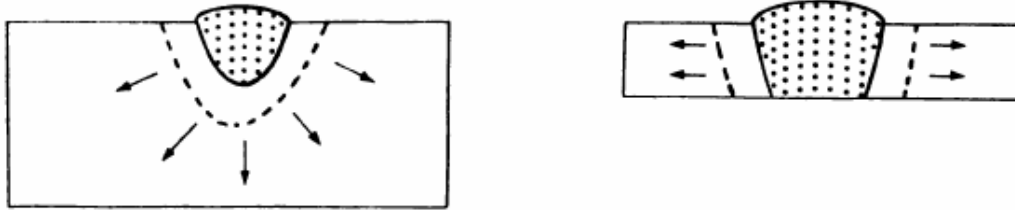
Three and two-dimensional heat flow welding [28].
